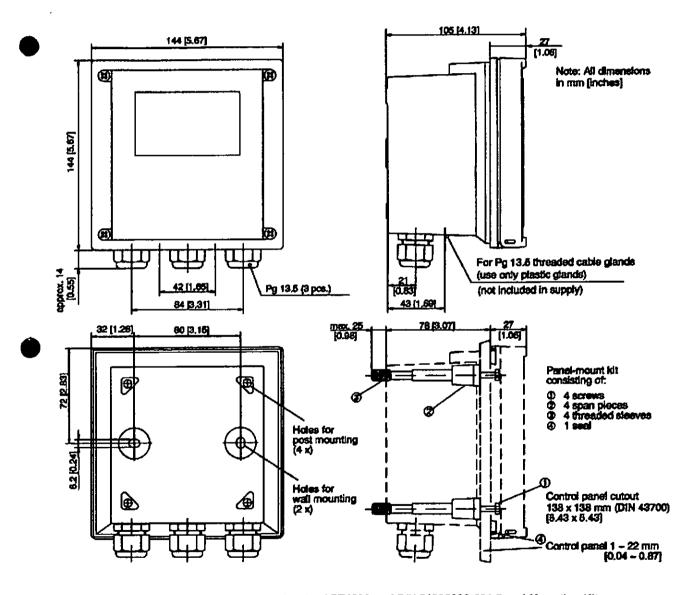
Dimension Drawing for APT4000 and P/N 51205990-001 Panel Mounting Kit
